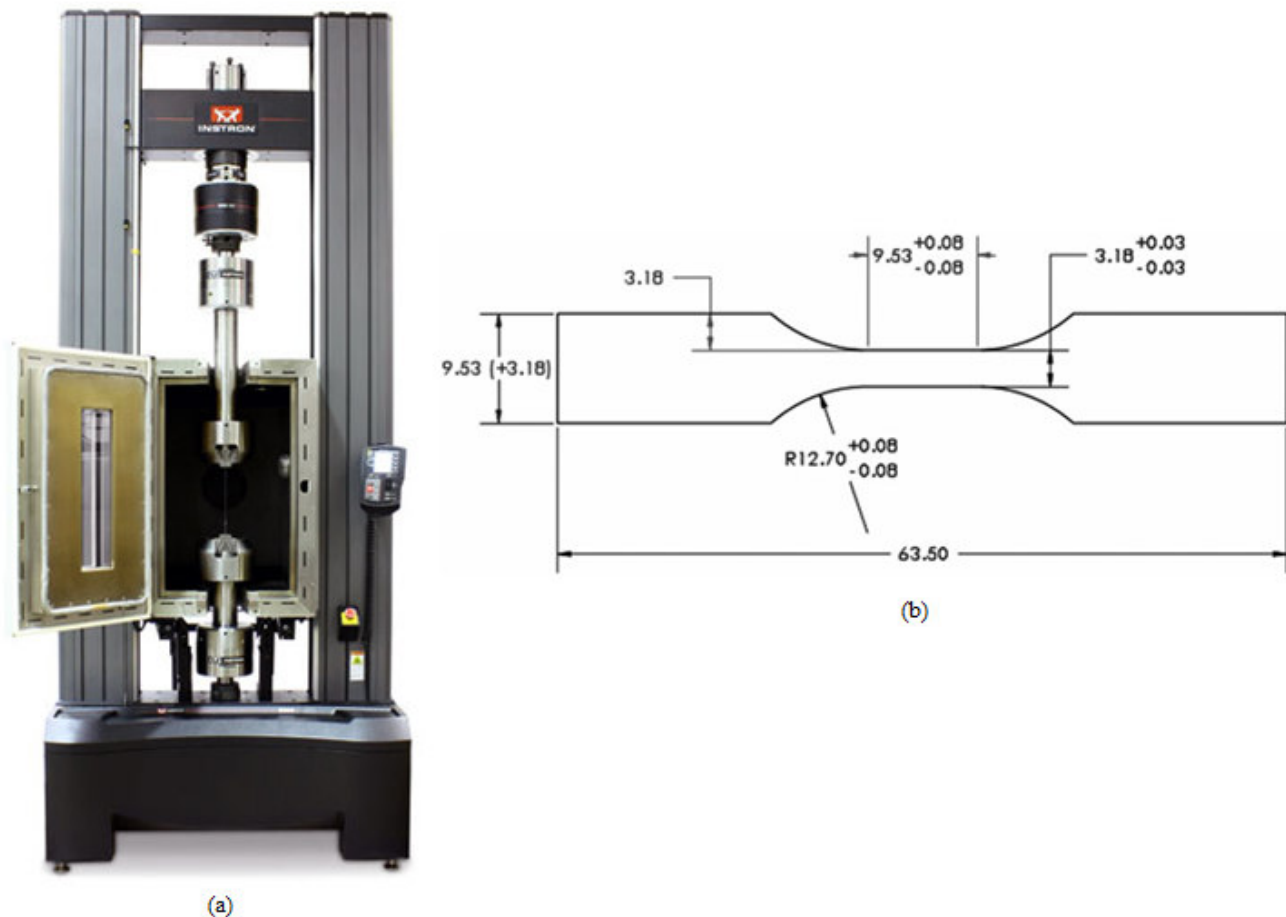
Tensile testing: UTM with temperature controlled chamber and (b) shape and dimensions of tensile specimen.
